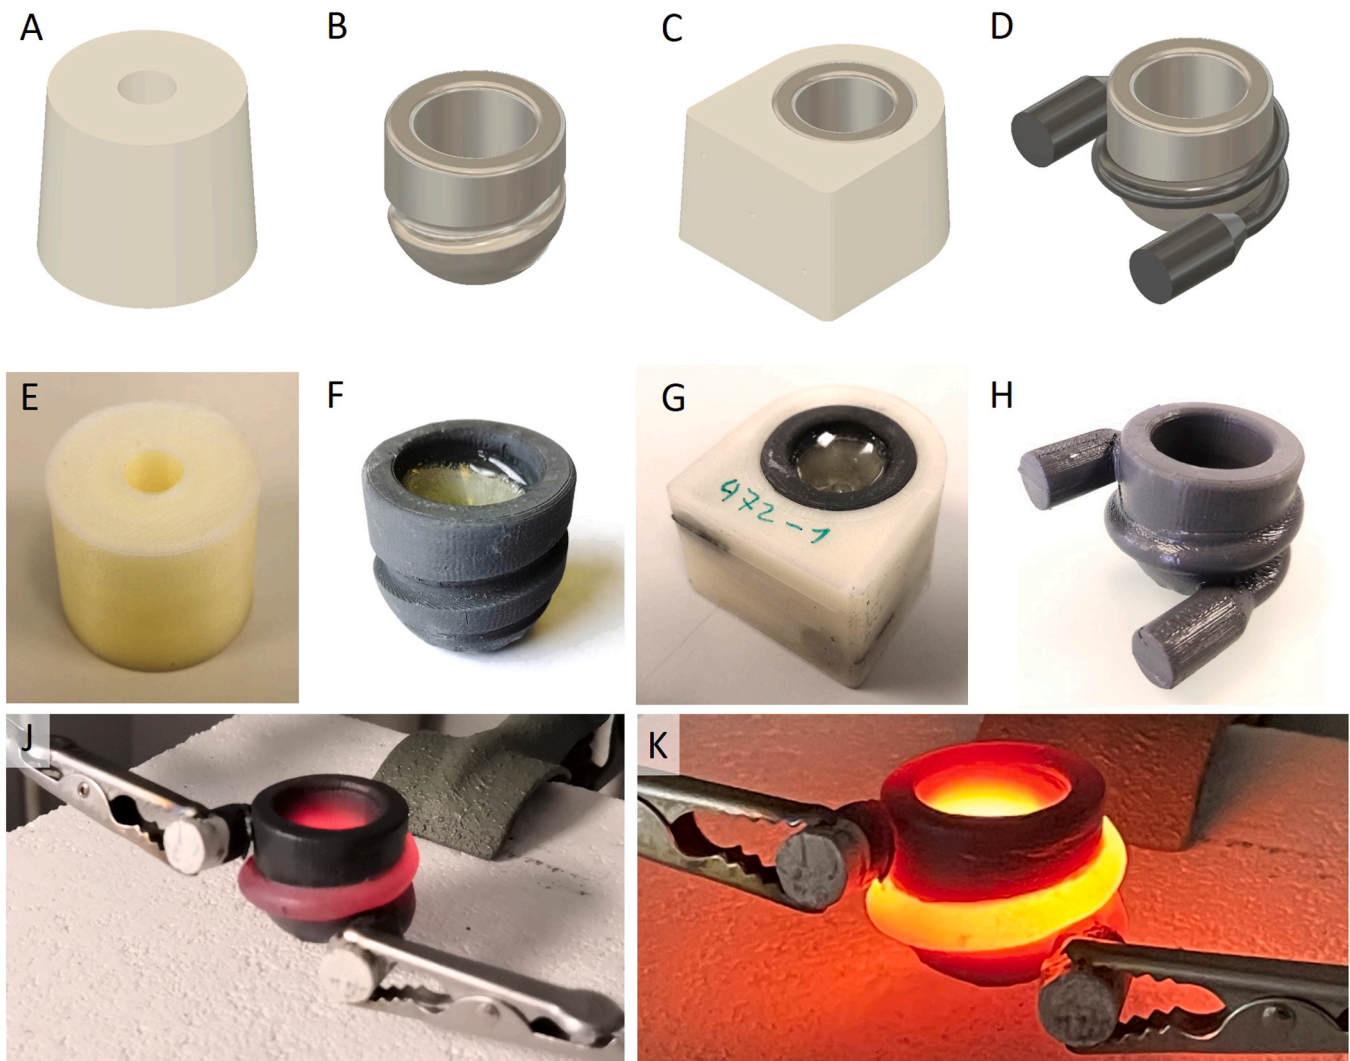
Different fabrication stages of 2 C-CIM with two PVA molds. CAD drawings (A-D) and photographs (E-K). The first PVA mold (A, E) is used to injection mold the crucible (B, F), which is then pressed into the second PVA mold (C, G) into which the heating coil consisting of conductive MoSi₂ ceramic composite is injected. In this stage, PVA inside the crucible is not fully dissolved and gives additional stability during the injection molding of the heating coil. The 2 C green body is obtained by dissolving the second PVA mold in water (H). Glow tests of the sintered part at 110 W (J) and 210 W (K).
